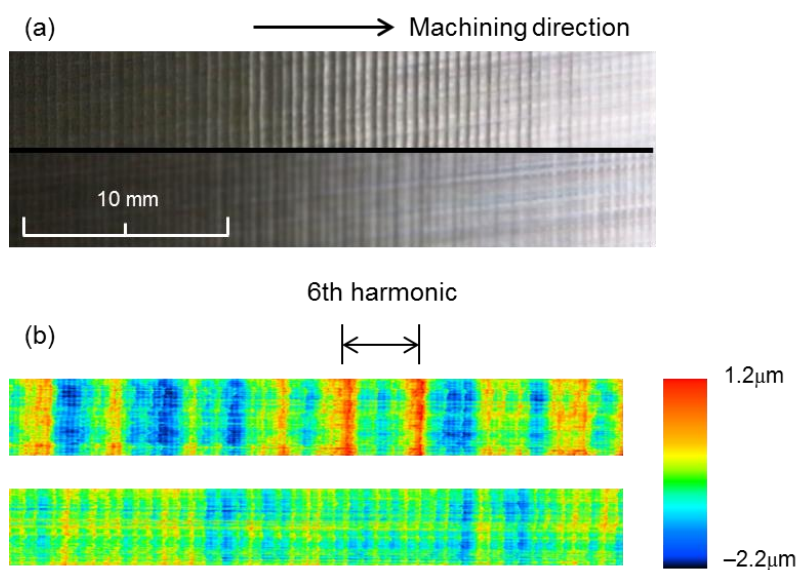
Machining surface of FANUC ROBODRILL α -D14iMA5. Top: conventional method,
